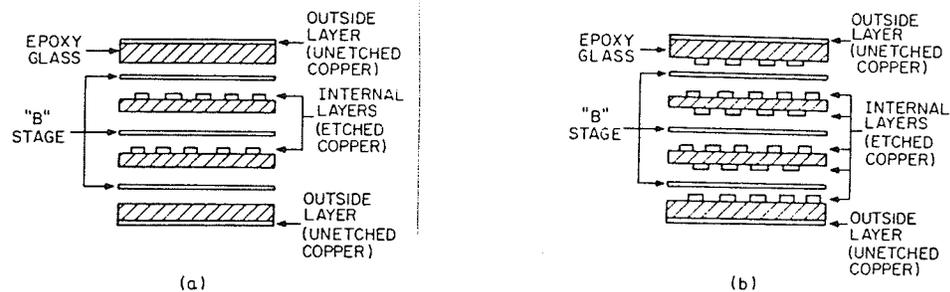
The lay-up of multilayer board. (a) Four-layer board; (b) Eight-layer board. From: [Clyd86]
